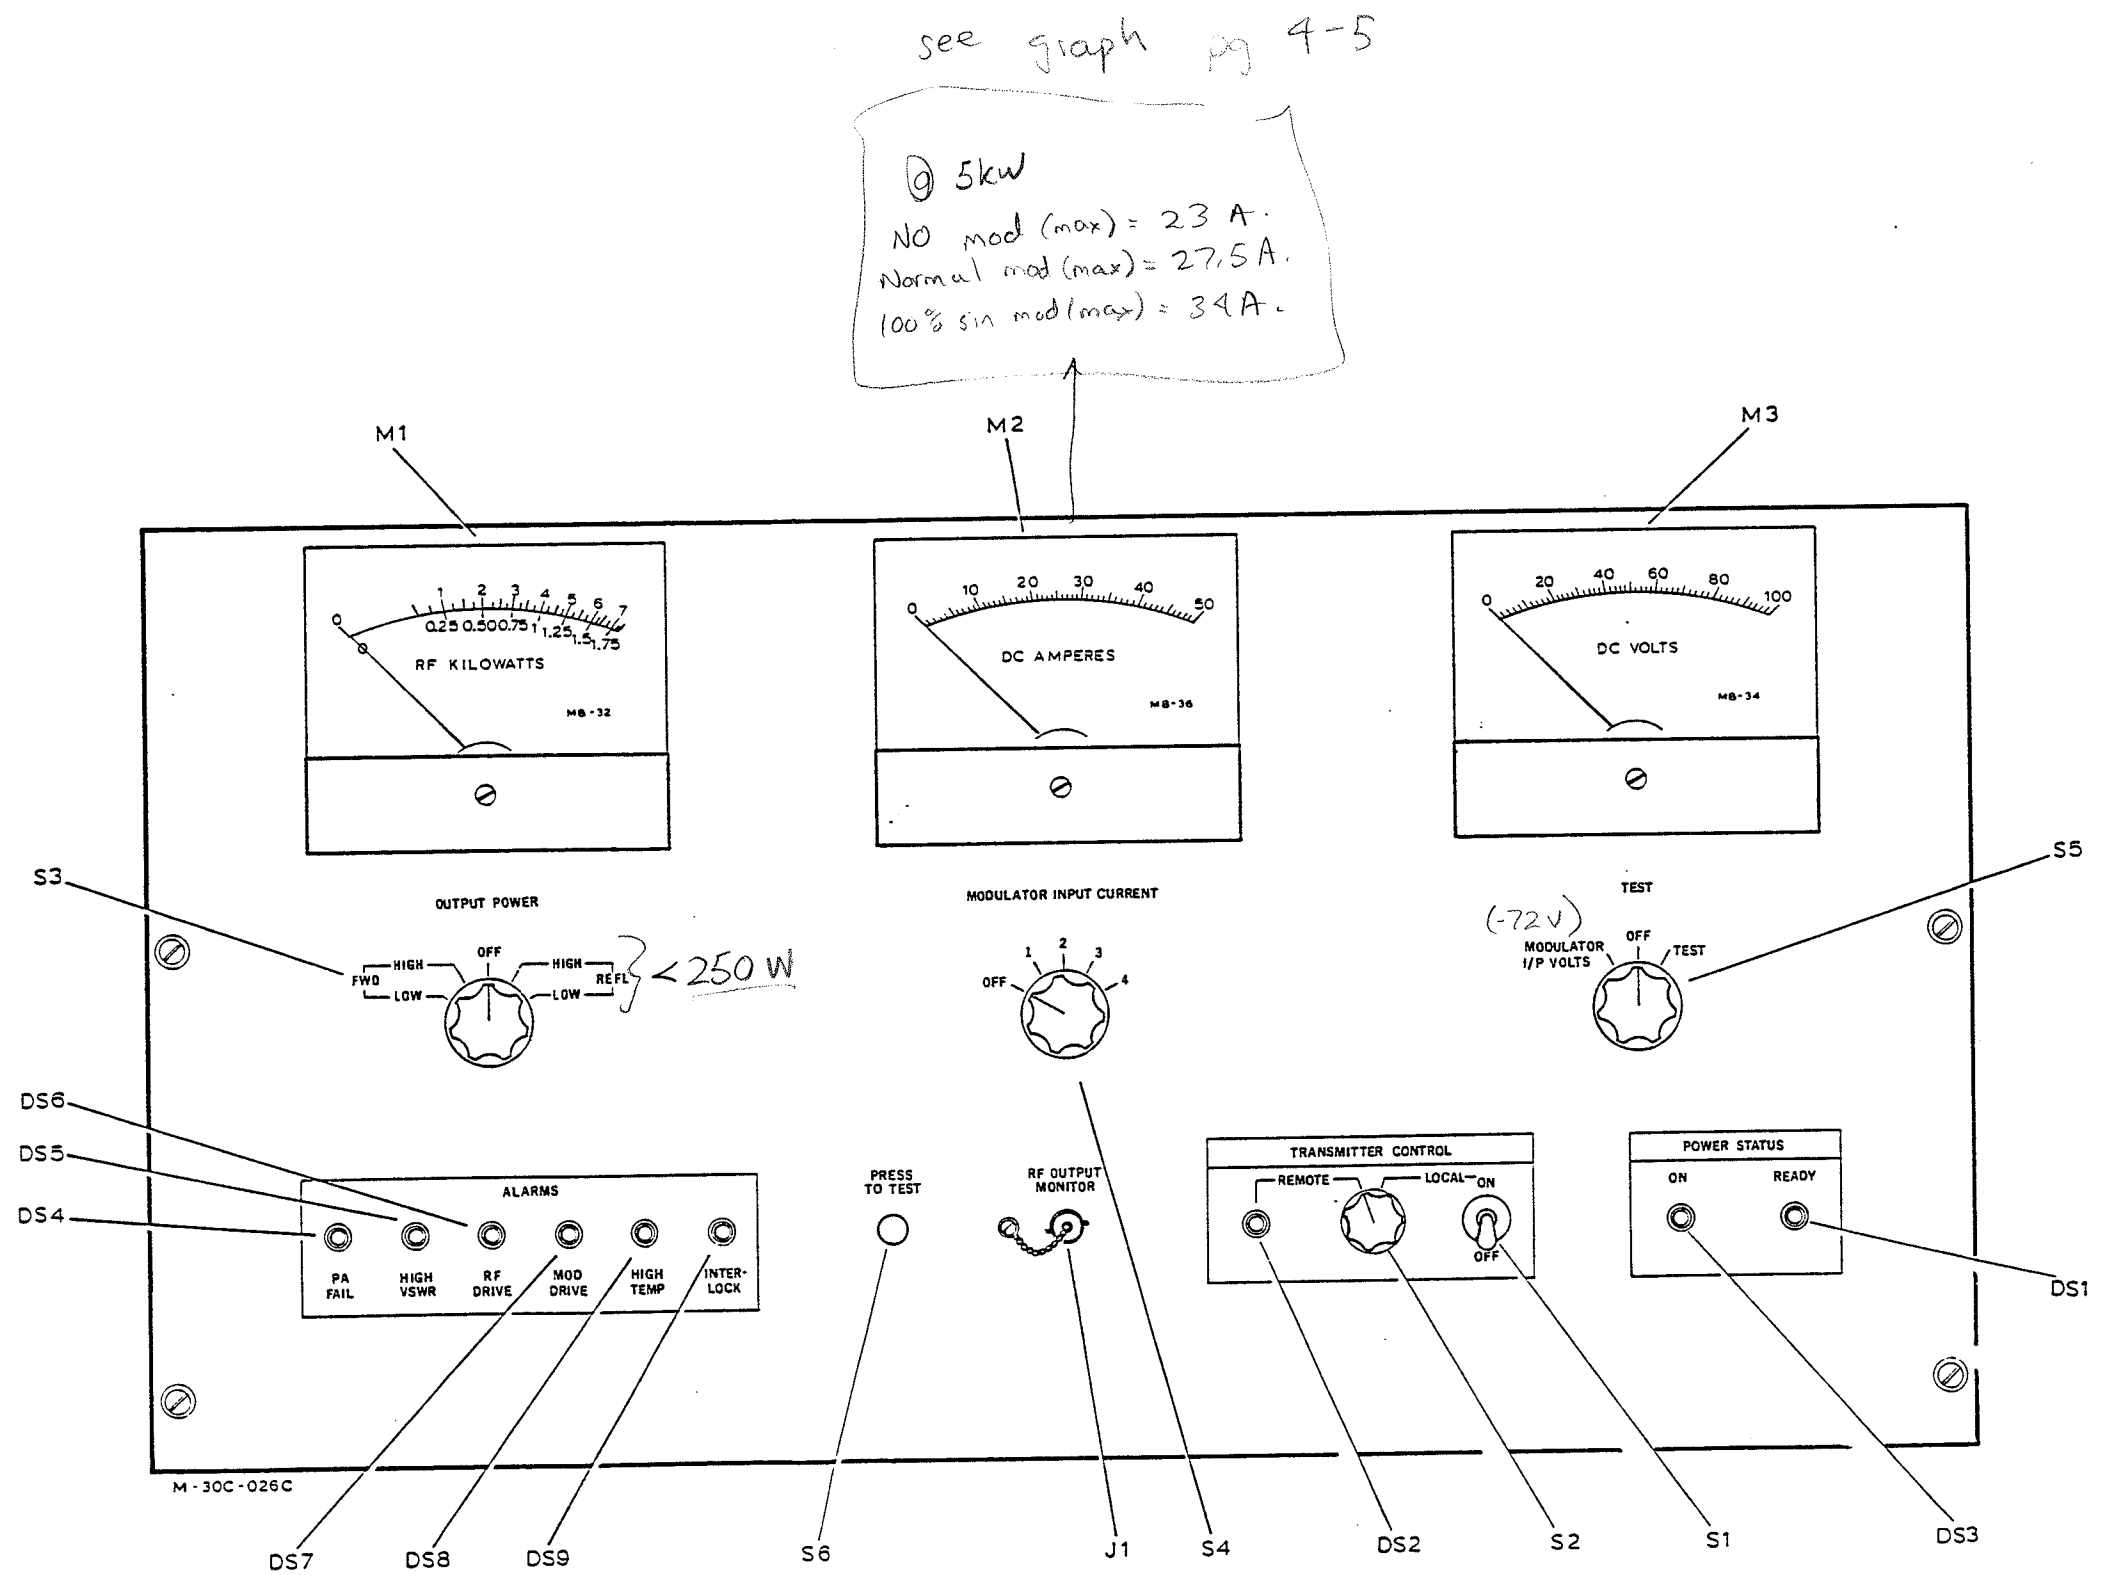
Assembly Detail - NAC21/4 Control/Monitor Panel, Front View
